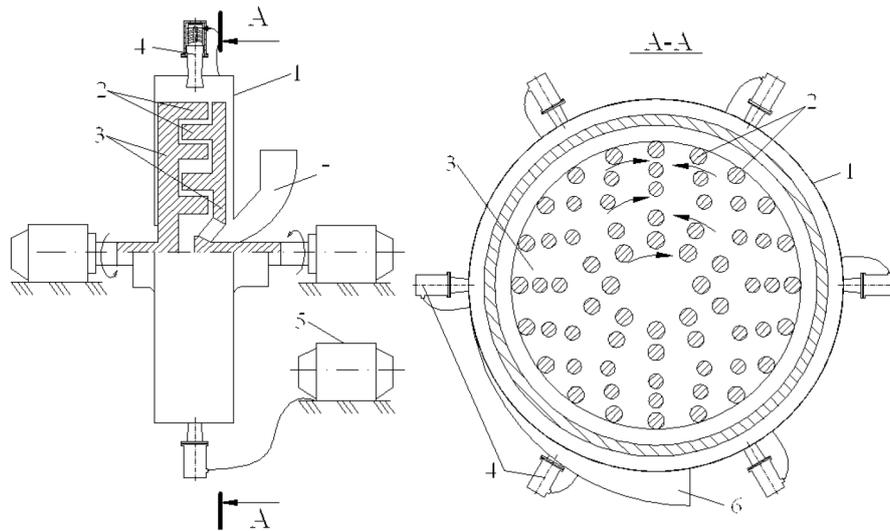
The scheme of disintegrator: 1 – housing; 2 – pins; 3 – discs 4 – nozzles; 5 – pump, 6 – discharge; 7 – feeding cone
